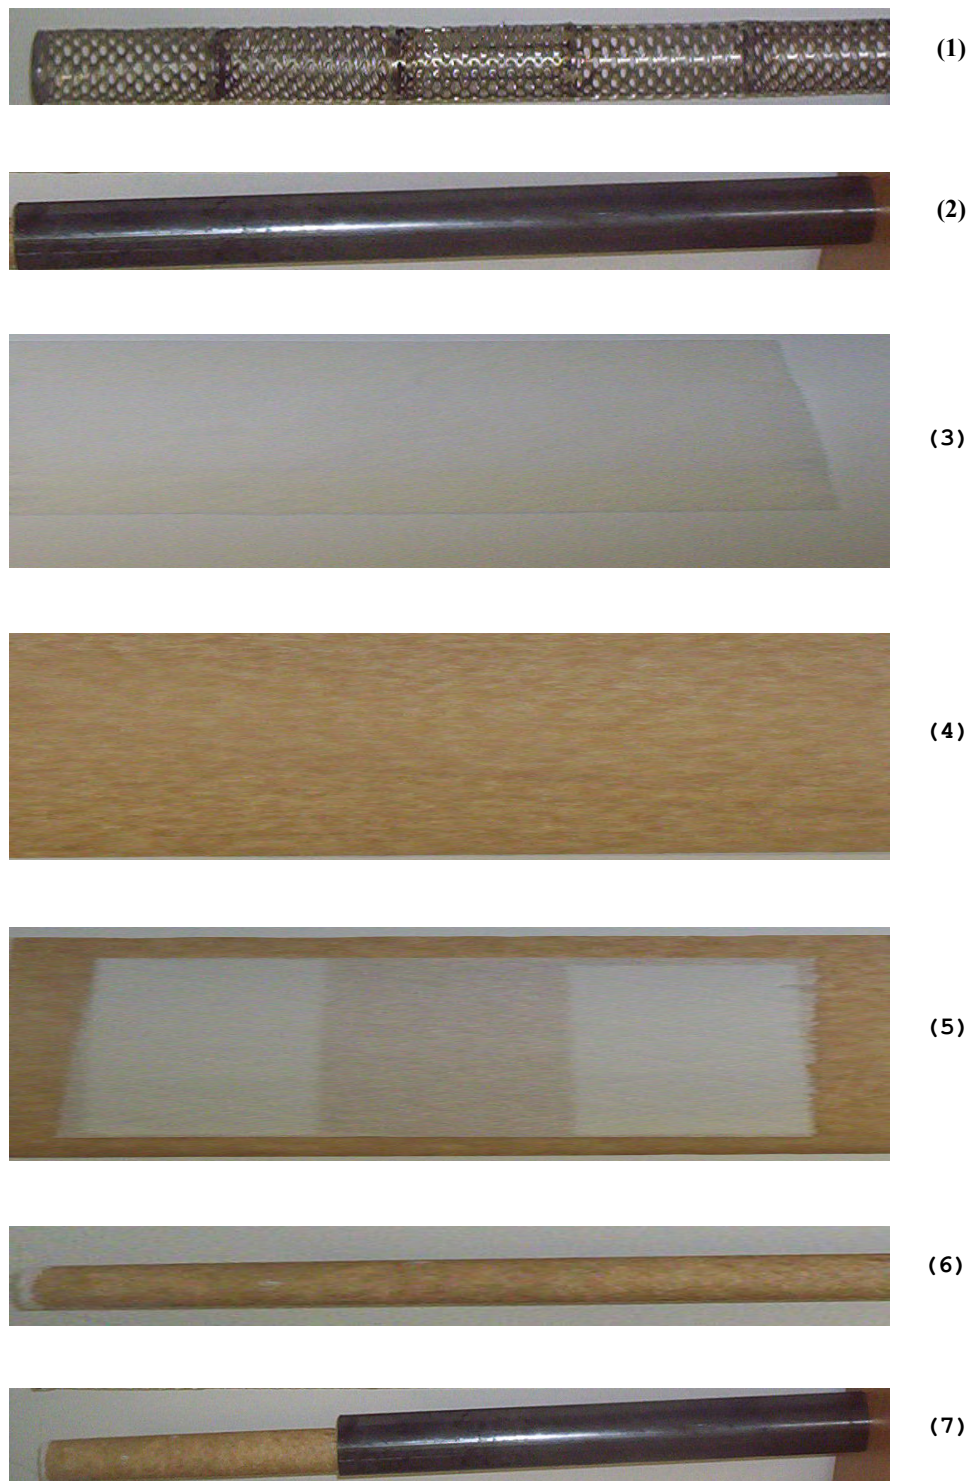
Seven steps involved in the construction of evaporative cooler concentric tubes
